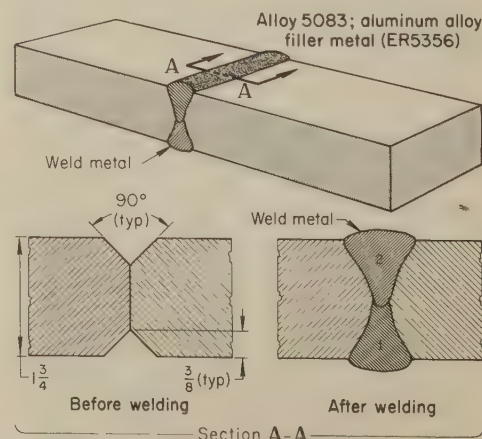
Edge preparation for high-current-density welding of aluminum plate 1 1/4 in. thick, with one pass from each side
